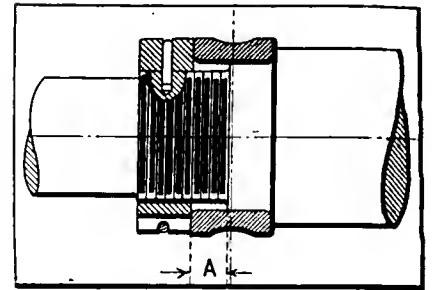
Method of clamping inner raceway of an annular type ball bearing, showing threaded ring and locking device.
